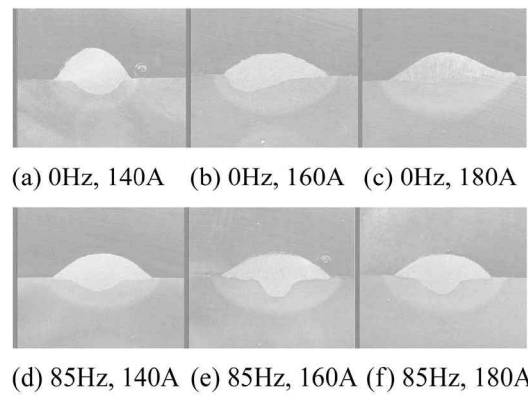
Cross-sectional profiles of the weld beads produced at a wire-feeding rate of 60 mm/s under different welding currents and different wire oscillation frequencies
